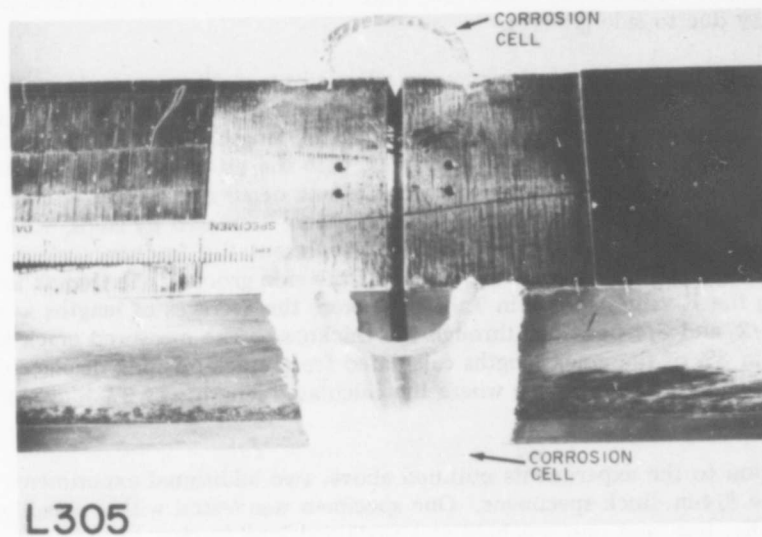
Corrosion cell in place on a 2-in.-thick specimen
